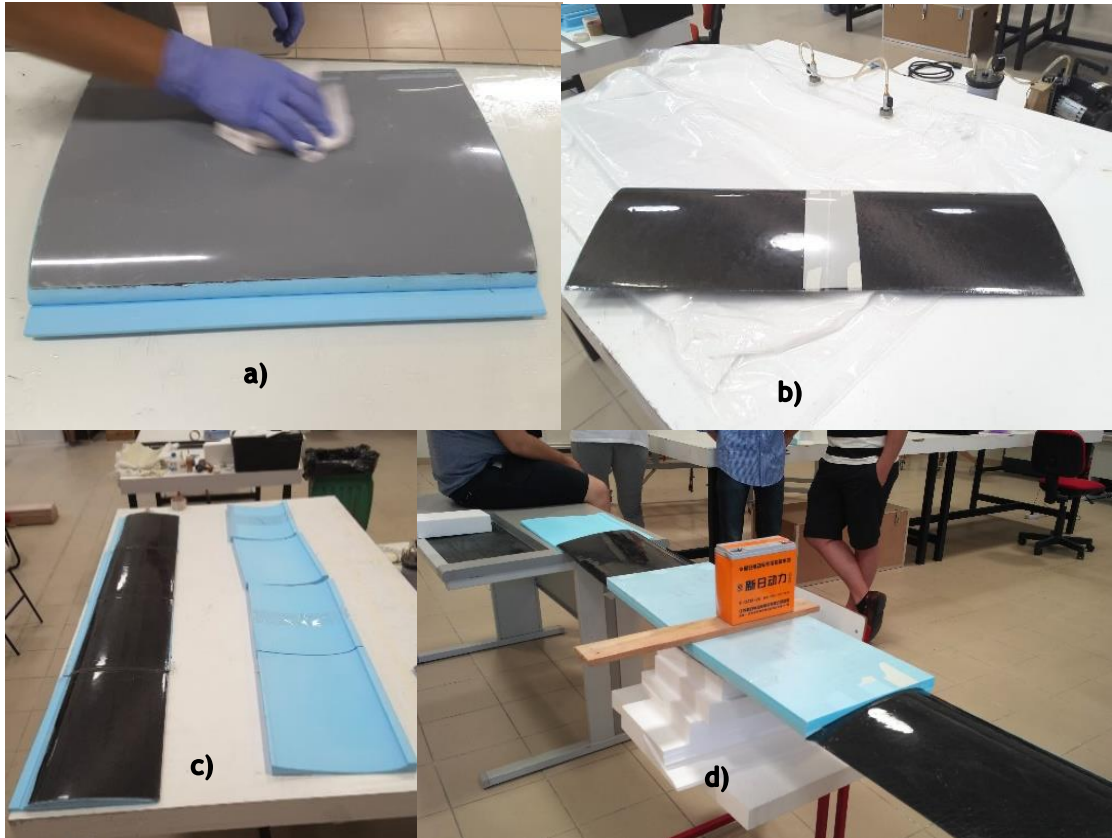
Construction test of the wing panel, where in a) is one panel laminated, b) are two joined panels, in c) 1.8m of span are ready to construction test represented in d) with a 7kg battery.
